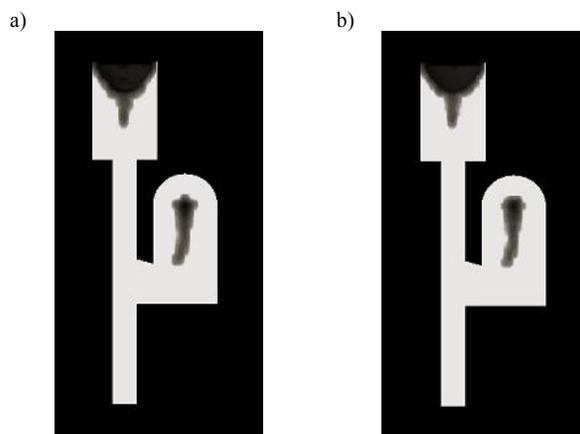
Exemplary distributions of shrinkage defects for steel castings with traditional feeders obtained in: a – green sand mould, b – furan sand mould
